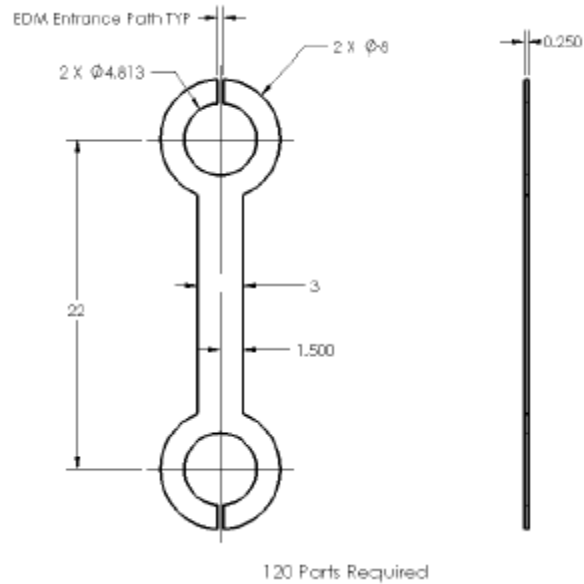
Foil dimensions shown in mm. Round parts at the ends serve to attach the foil to a holder.
